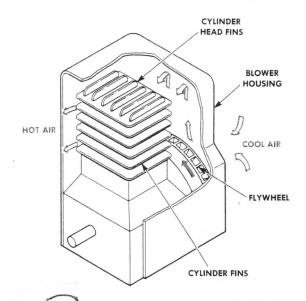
Cool air is pumped by the flywhee around the hot engine parts to cool them.
